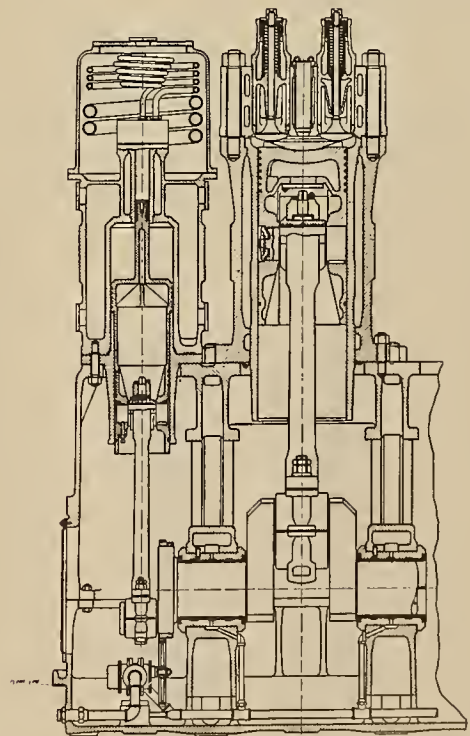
Section of Busch-Sulzer Bros.-Diesel Engine.
